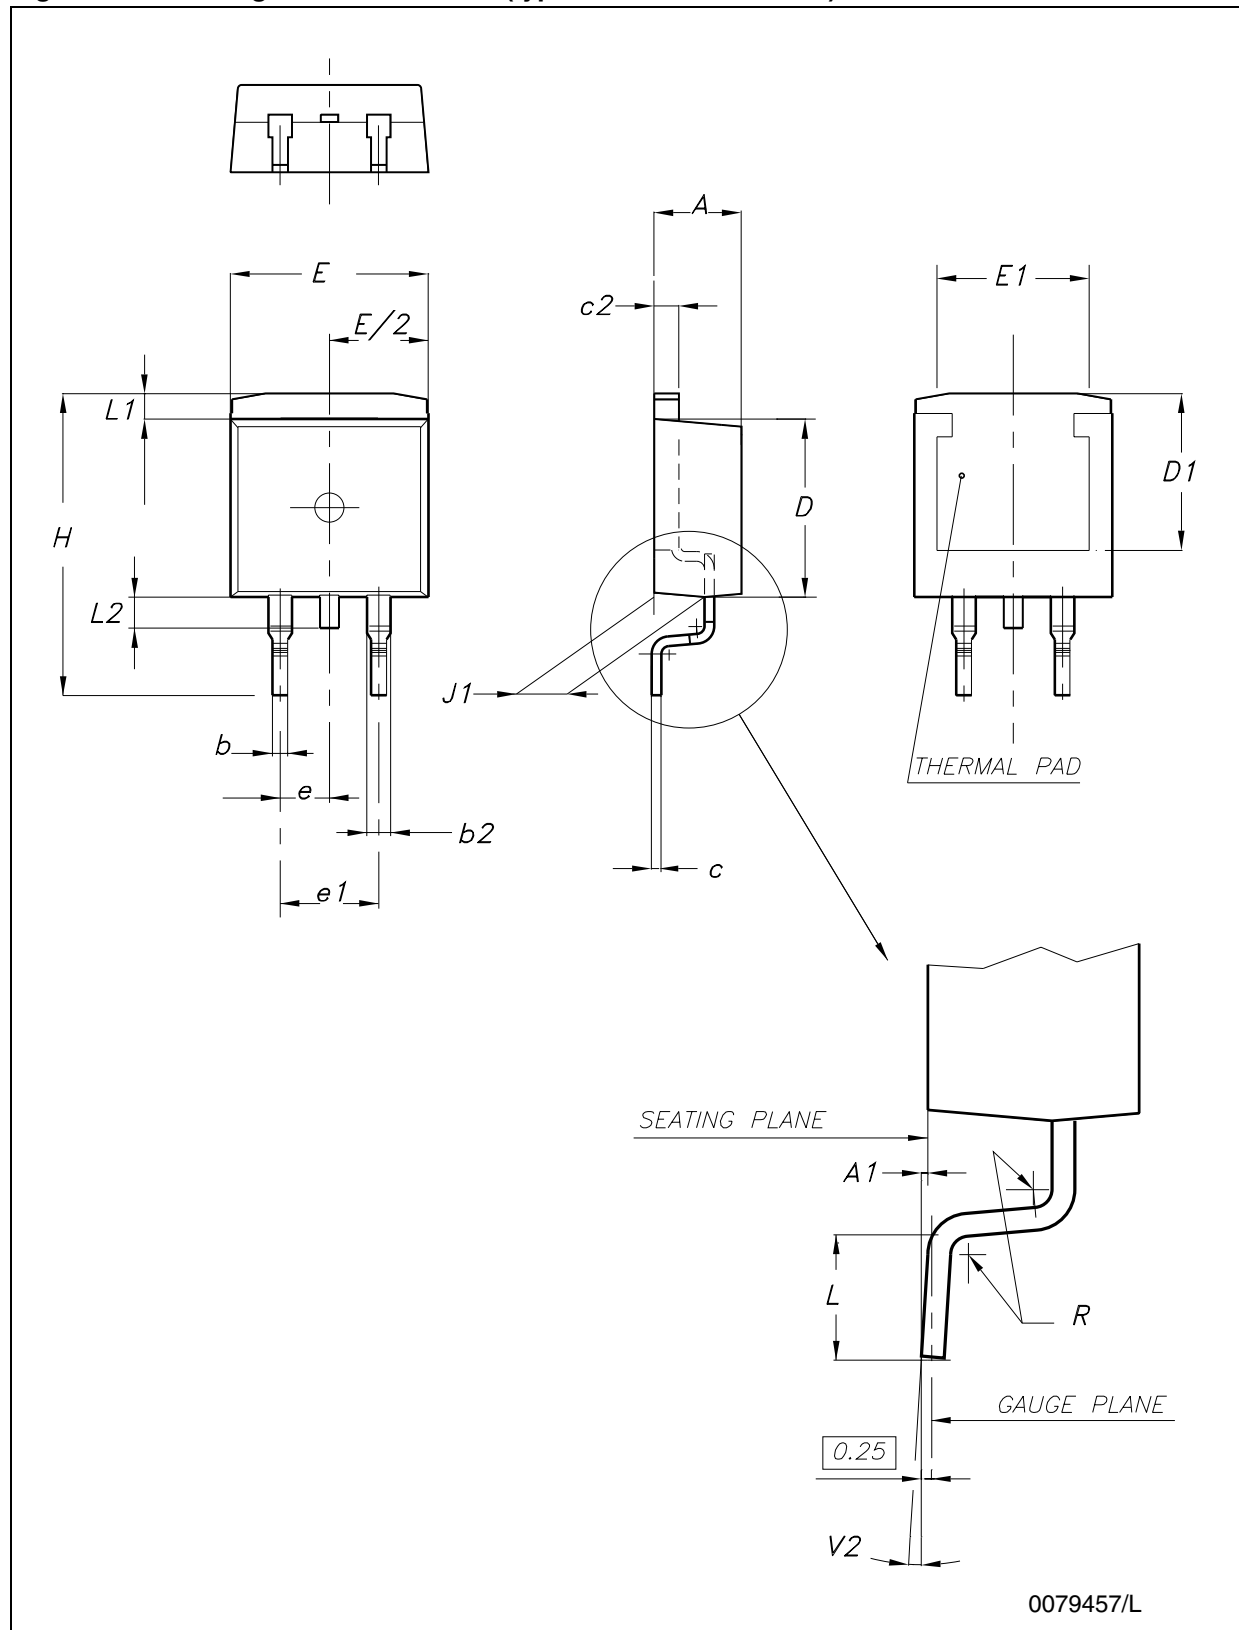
Drawing dimension D²PAK (type WOOSEOK-subcon.)
